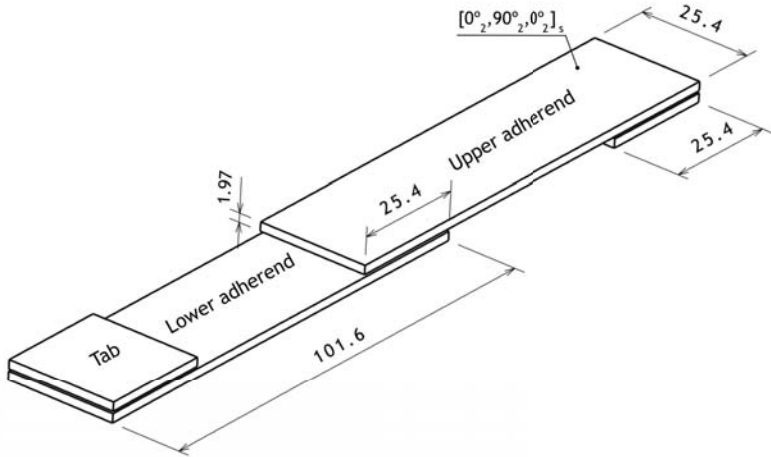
Geometry and approximate dimensions of the single lap joint specimen (values in mm).
